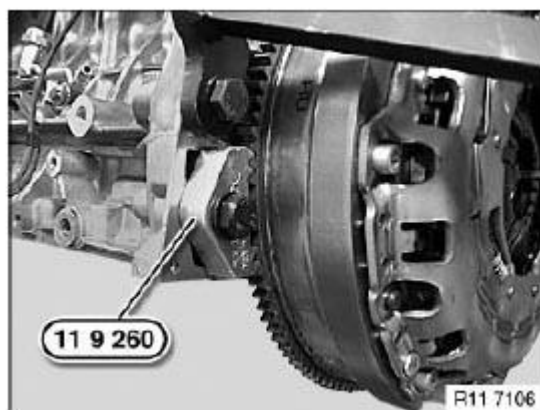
Securing Flywheel (Crankshaft) With Special Tool (11 9 260)
